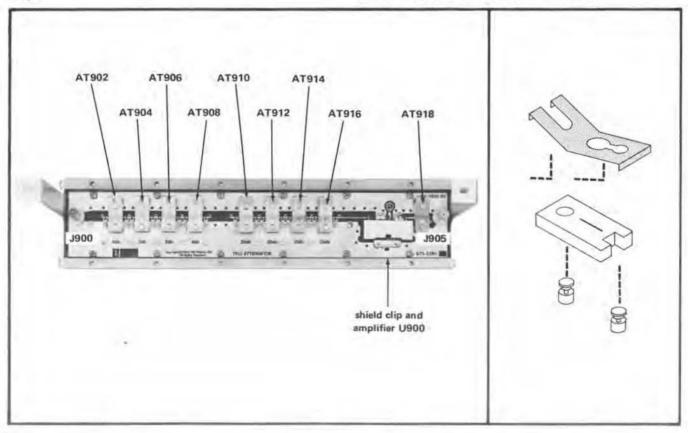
Illustration showing the location and mounting of the attenuator chips on the circuit board.
